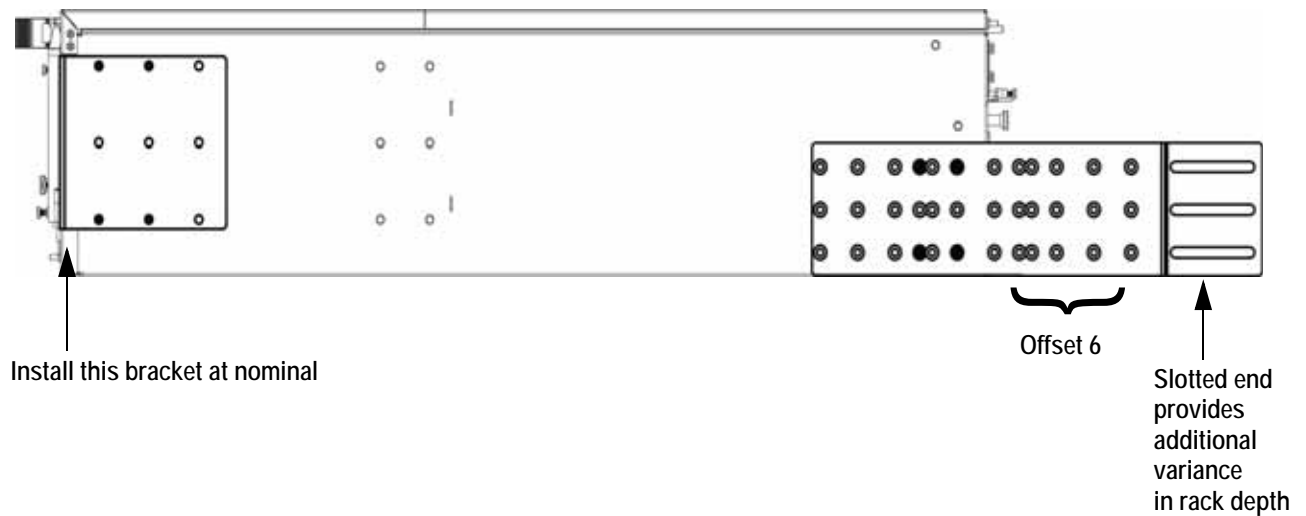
Bracket Mounting for 33.5" to 35.5" Rack
